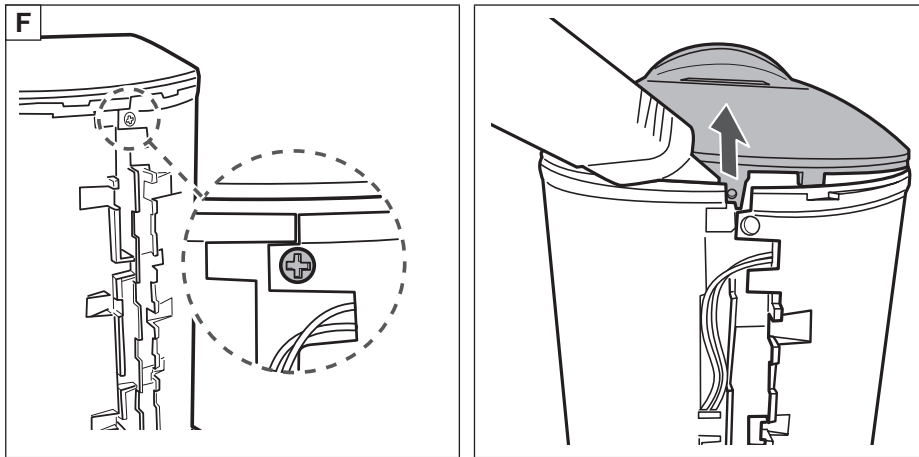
Figura F: remove the screw shown and lift the top cover up with the help of a tool.
